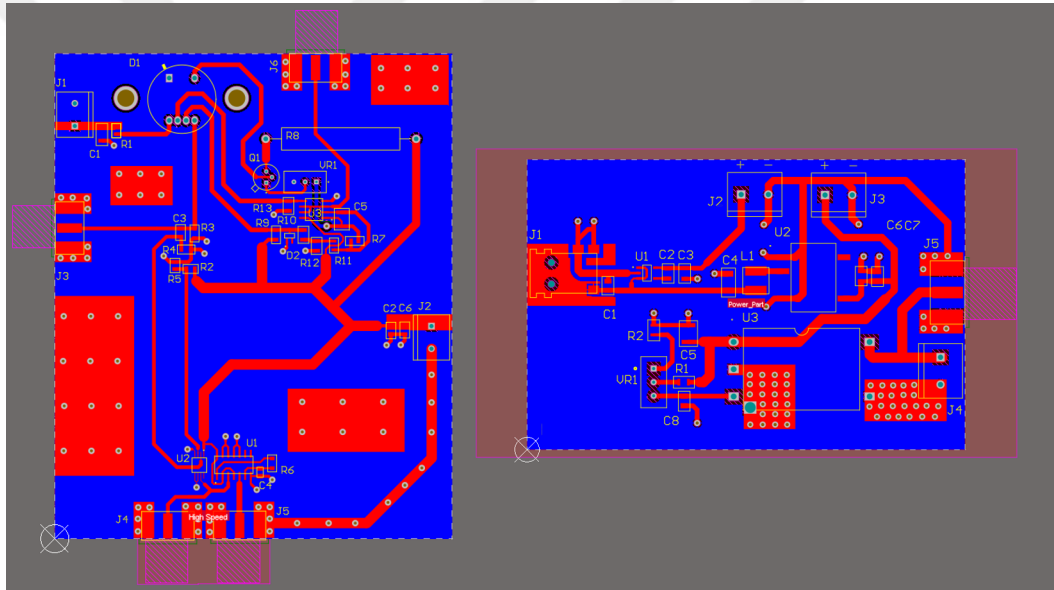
PCB drawing (left: quenching circuit, right: power circuit).
